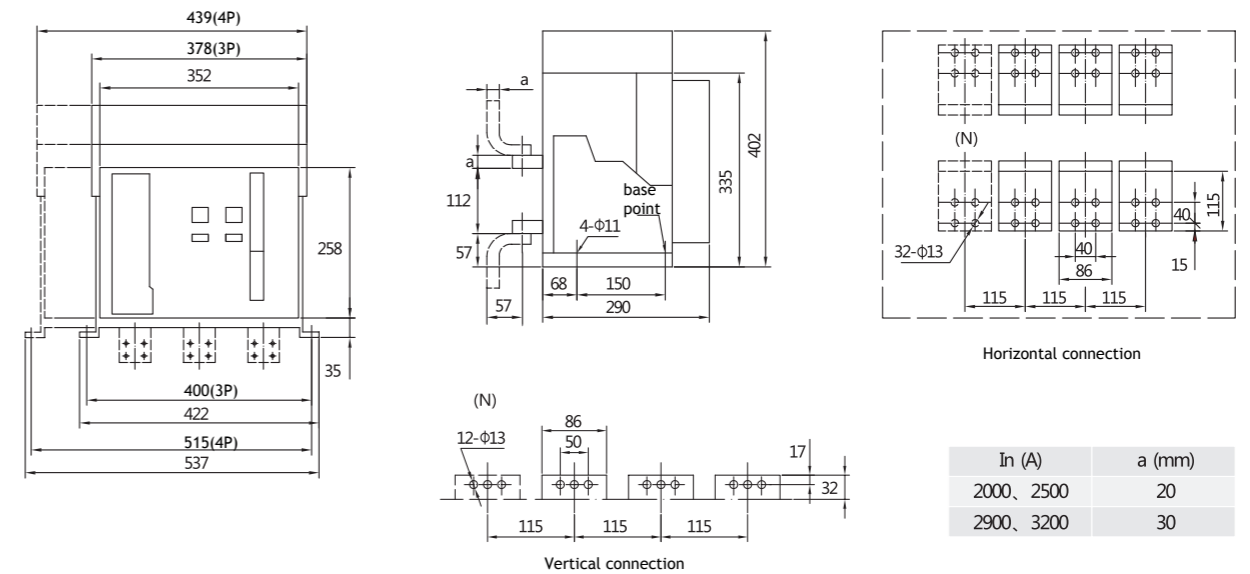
RDSW6-2000/3、2000/4 drawer type install and shape dimension
